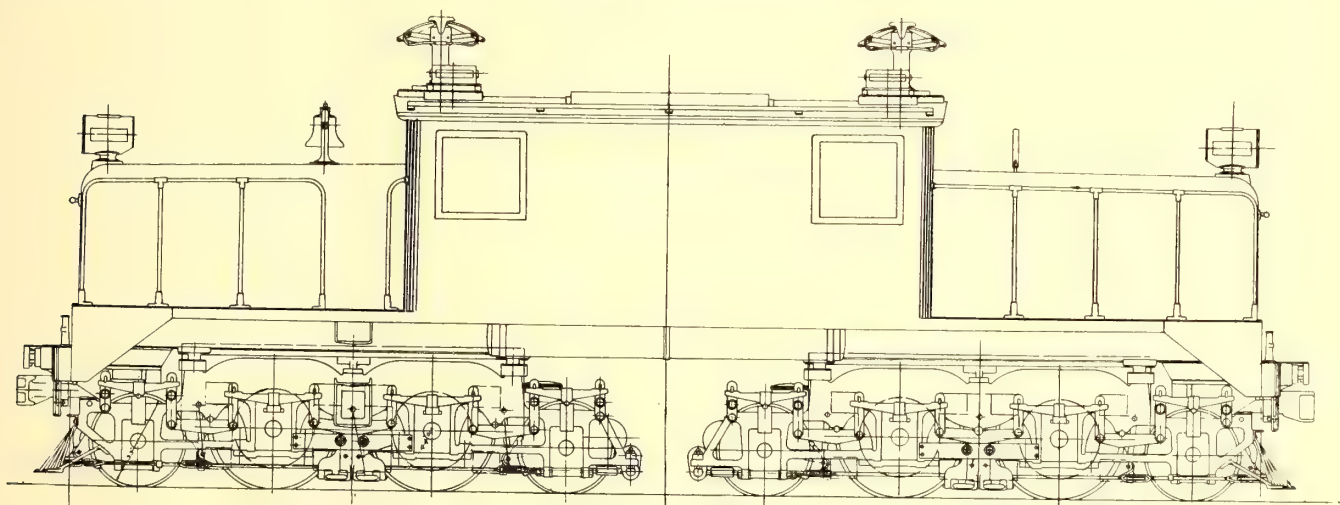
110-TON ELECTRIC LOCOMOTIVE EQUIPPED WITH FOUR GE 84 MOTORS
